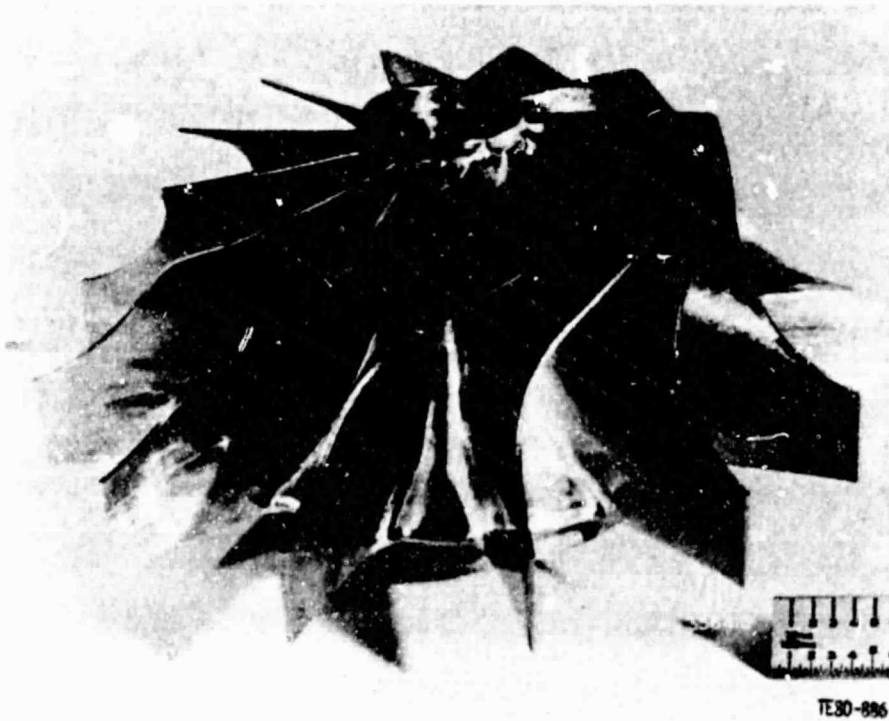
Photo of Finish-Machined Gasifier Turbine Wheel (top).
